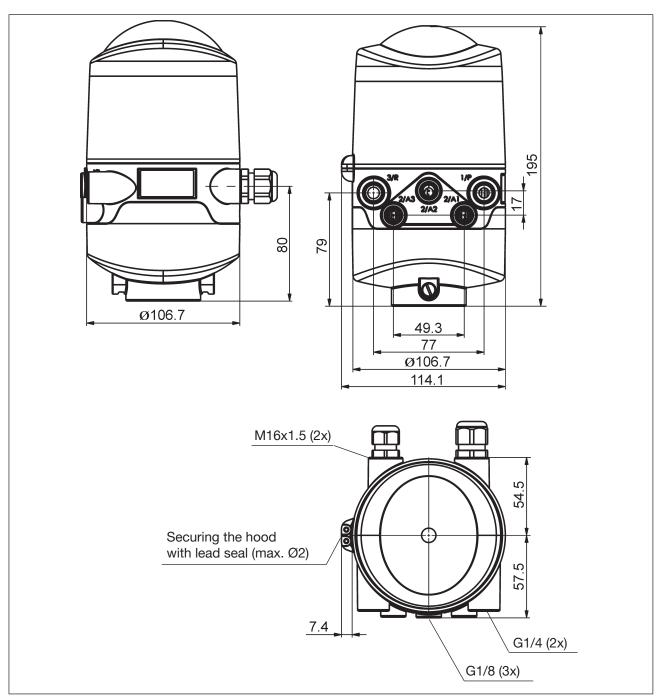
Dimensional drawing (for models with 1 to 3 solenoid valves)
